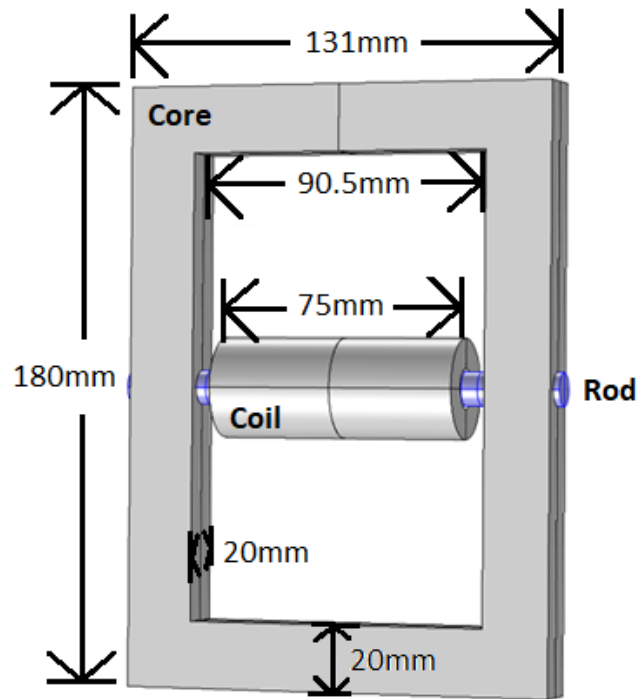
Illustration of main parts in the measuring sensor with physical dimensions
